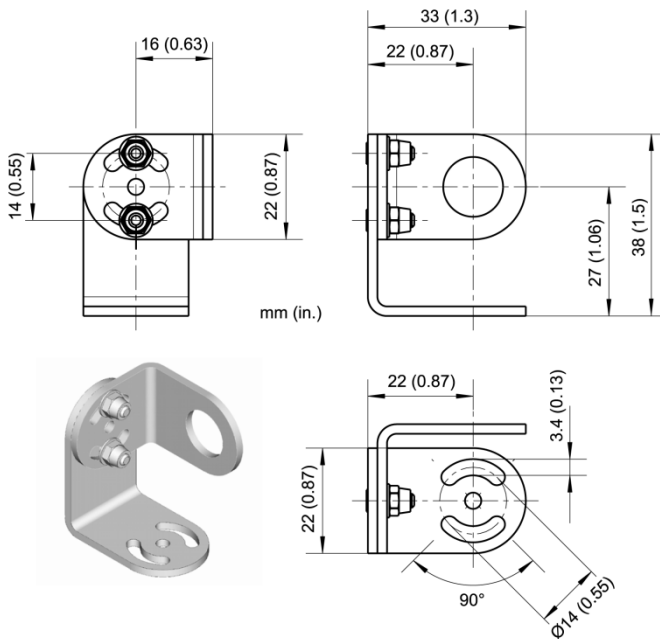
Adjustable Mounting Bracket (XXXMIACAB)
